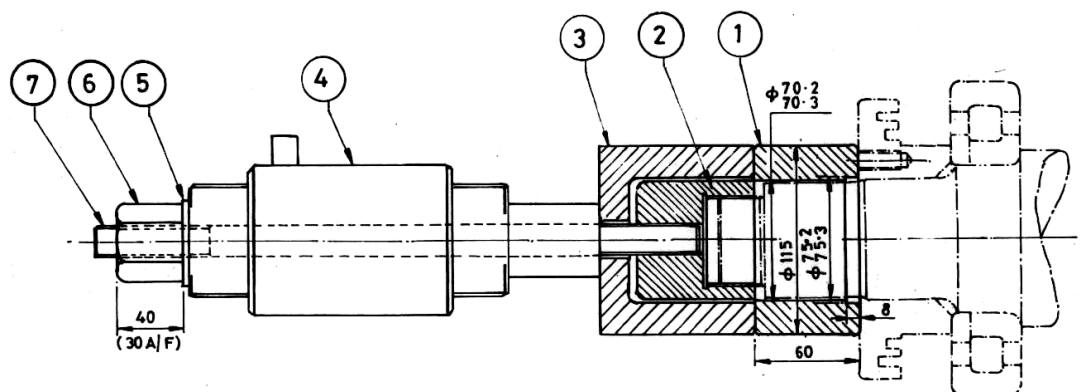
PRESSING TACKLE FOR CE OUTER BEARING WIPER (Tool No. 1405342)
